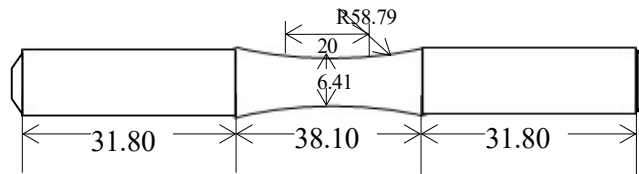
(a) Specimen dimensions for rotating beam fatigue test
